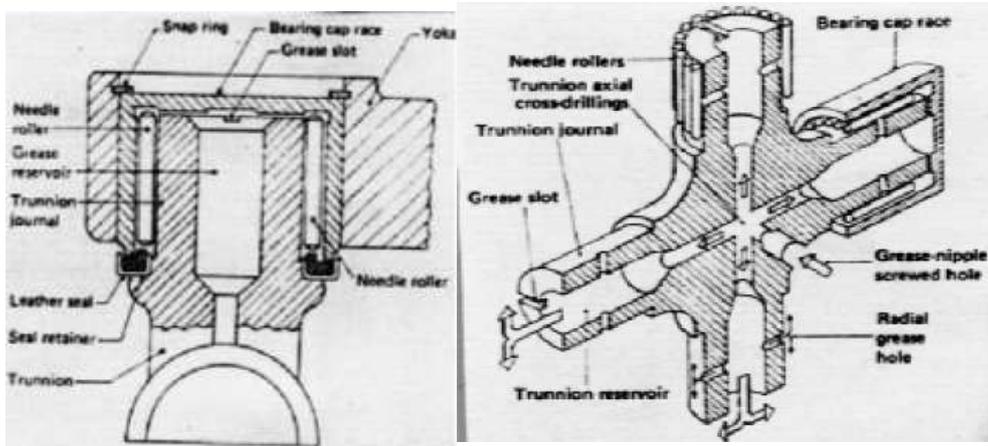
Universal Joint Trunnion Fig-4 Universal joint needle bearing lubrication
